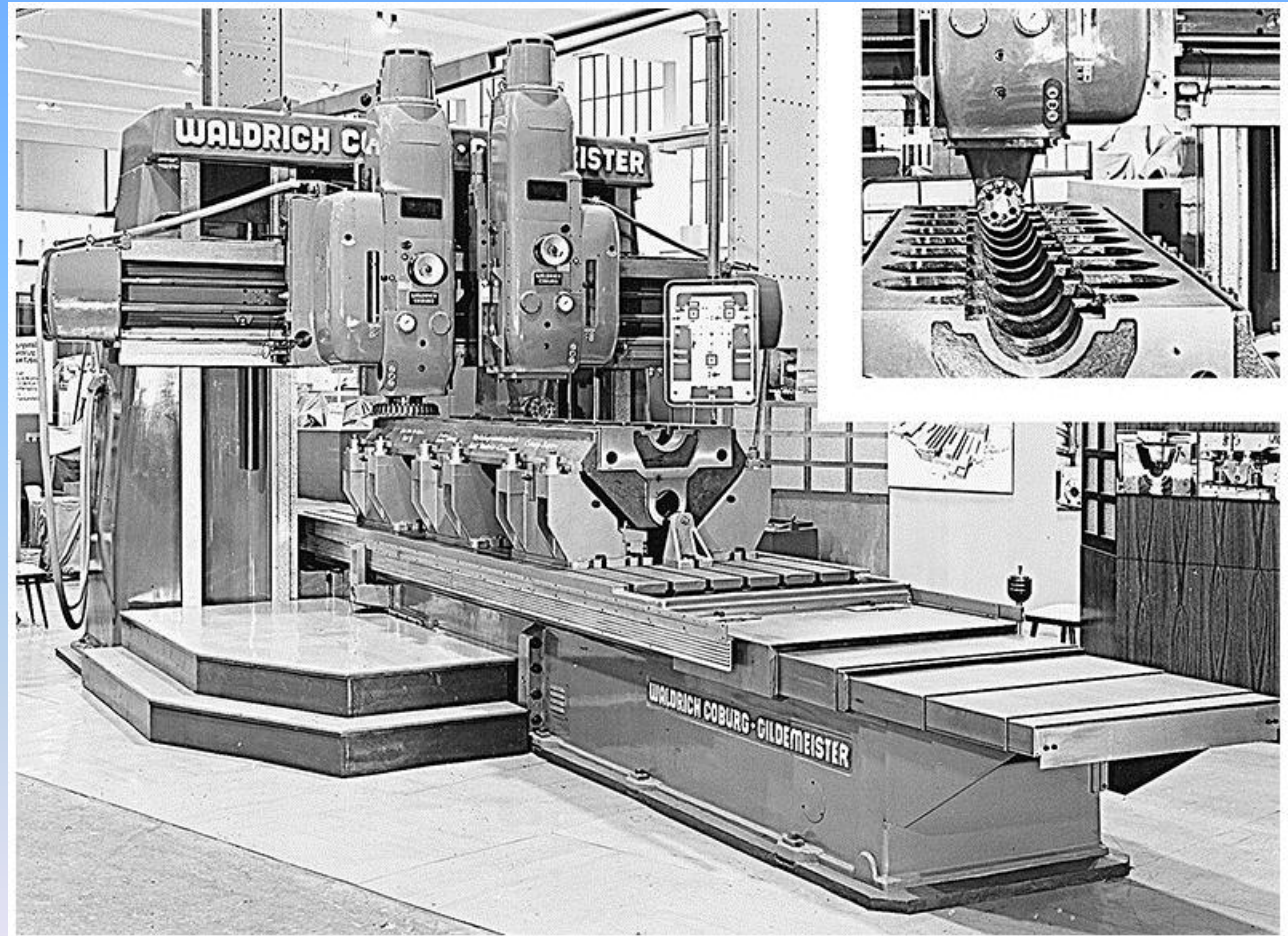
Bed-type vertical-spindle heavy-duty production machine tools for milling usually have three axes of motion.
